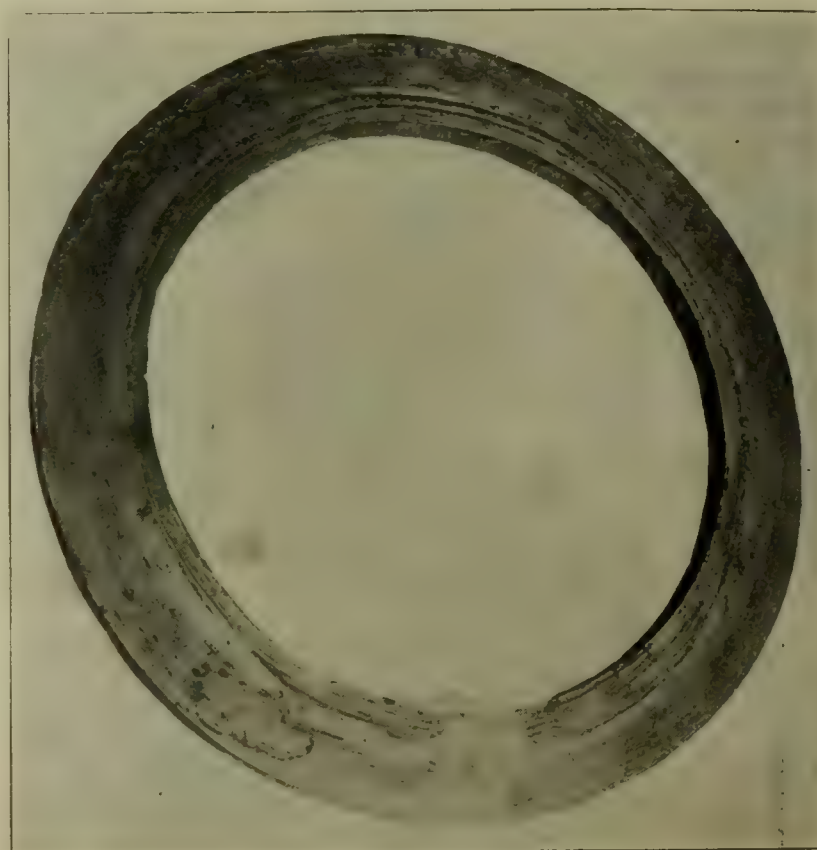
A—Ring Bent in Die and Then Welded at Fire.
